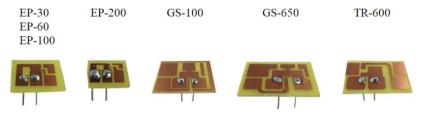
Five PCBs to measure R_{fixture} of each test fixture.
